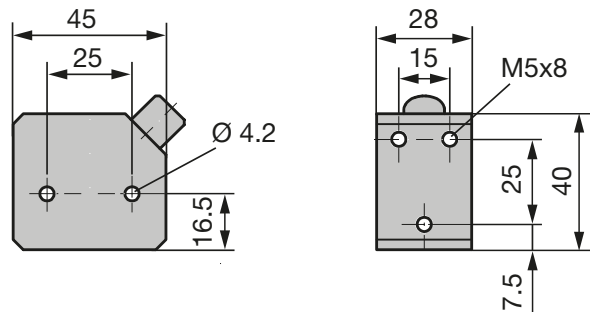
Installation dimensions of BTL5-P-4500-1 magnet
